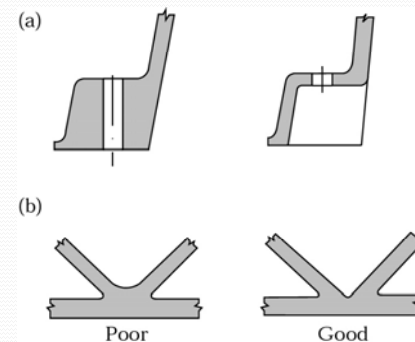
Examples of undesirable and desirable design practices for die-cast parts. Note that section-thickness uniformity is maintained throughout the part. *Source: American Die Casting Institute.
